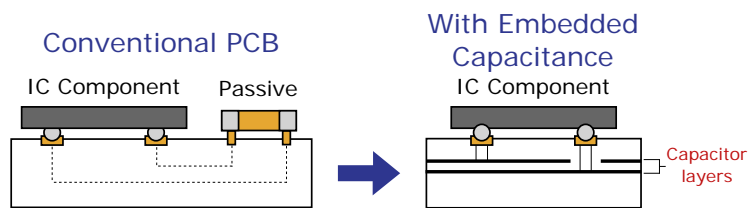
On the left, a drawing of a conventional PCB assembly with IC component and SMD capacitor mounted on top layer. On the right, the improved assembly using embedded capacitance material reducing the parasitic inductance between the two components [8].
